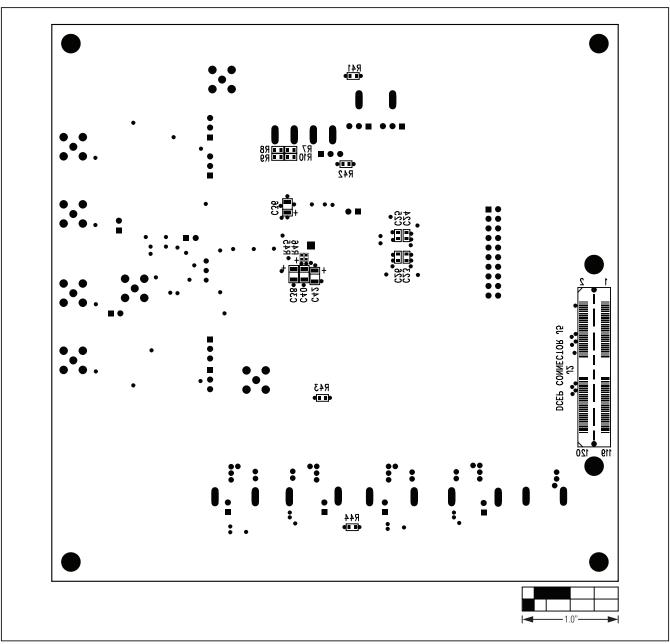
MAX19192 EV Kit Component Placement Guide—Solder Side
